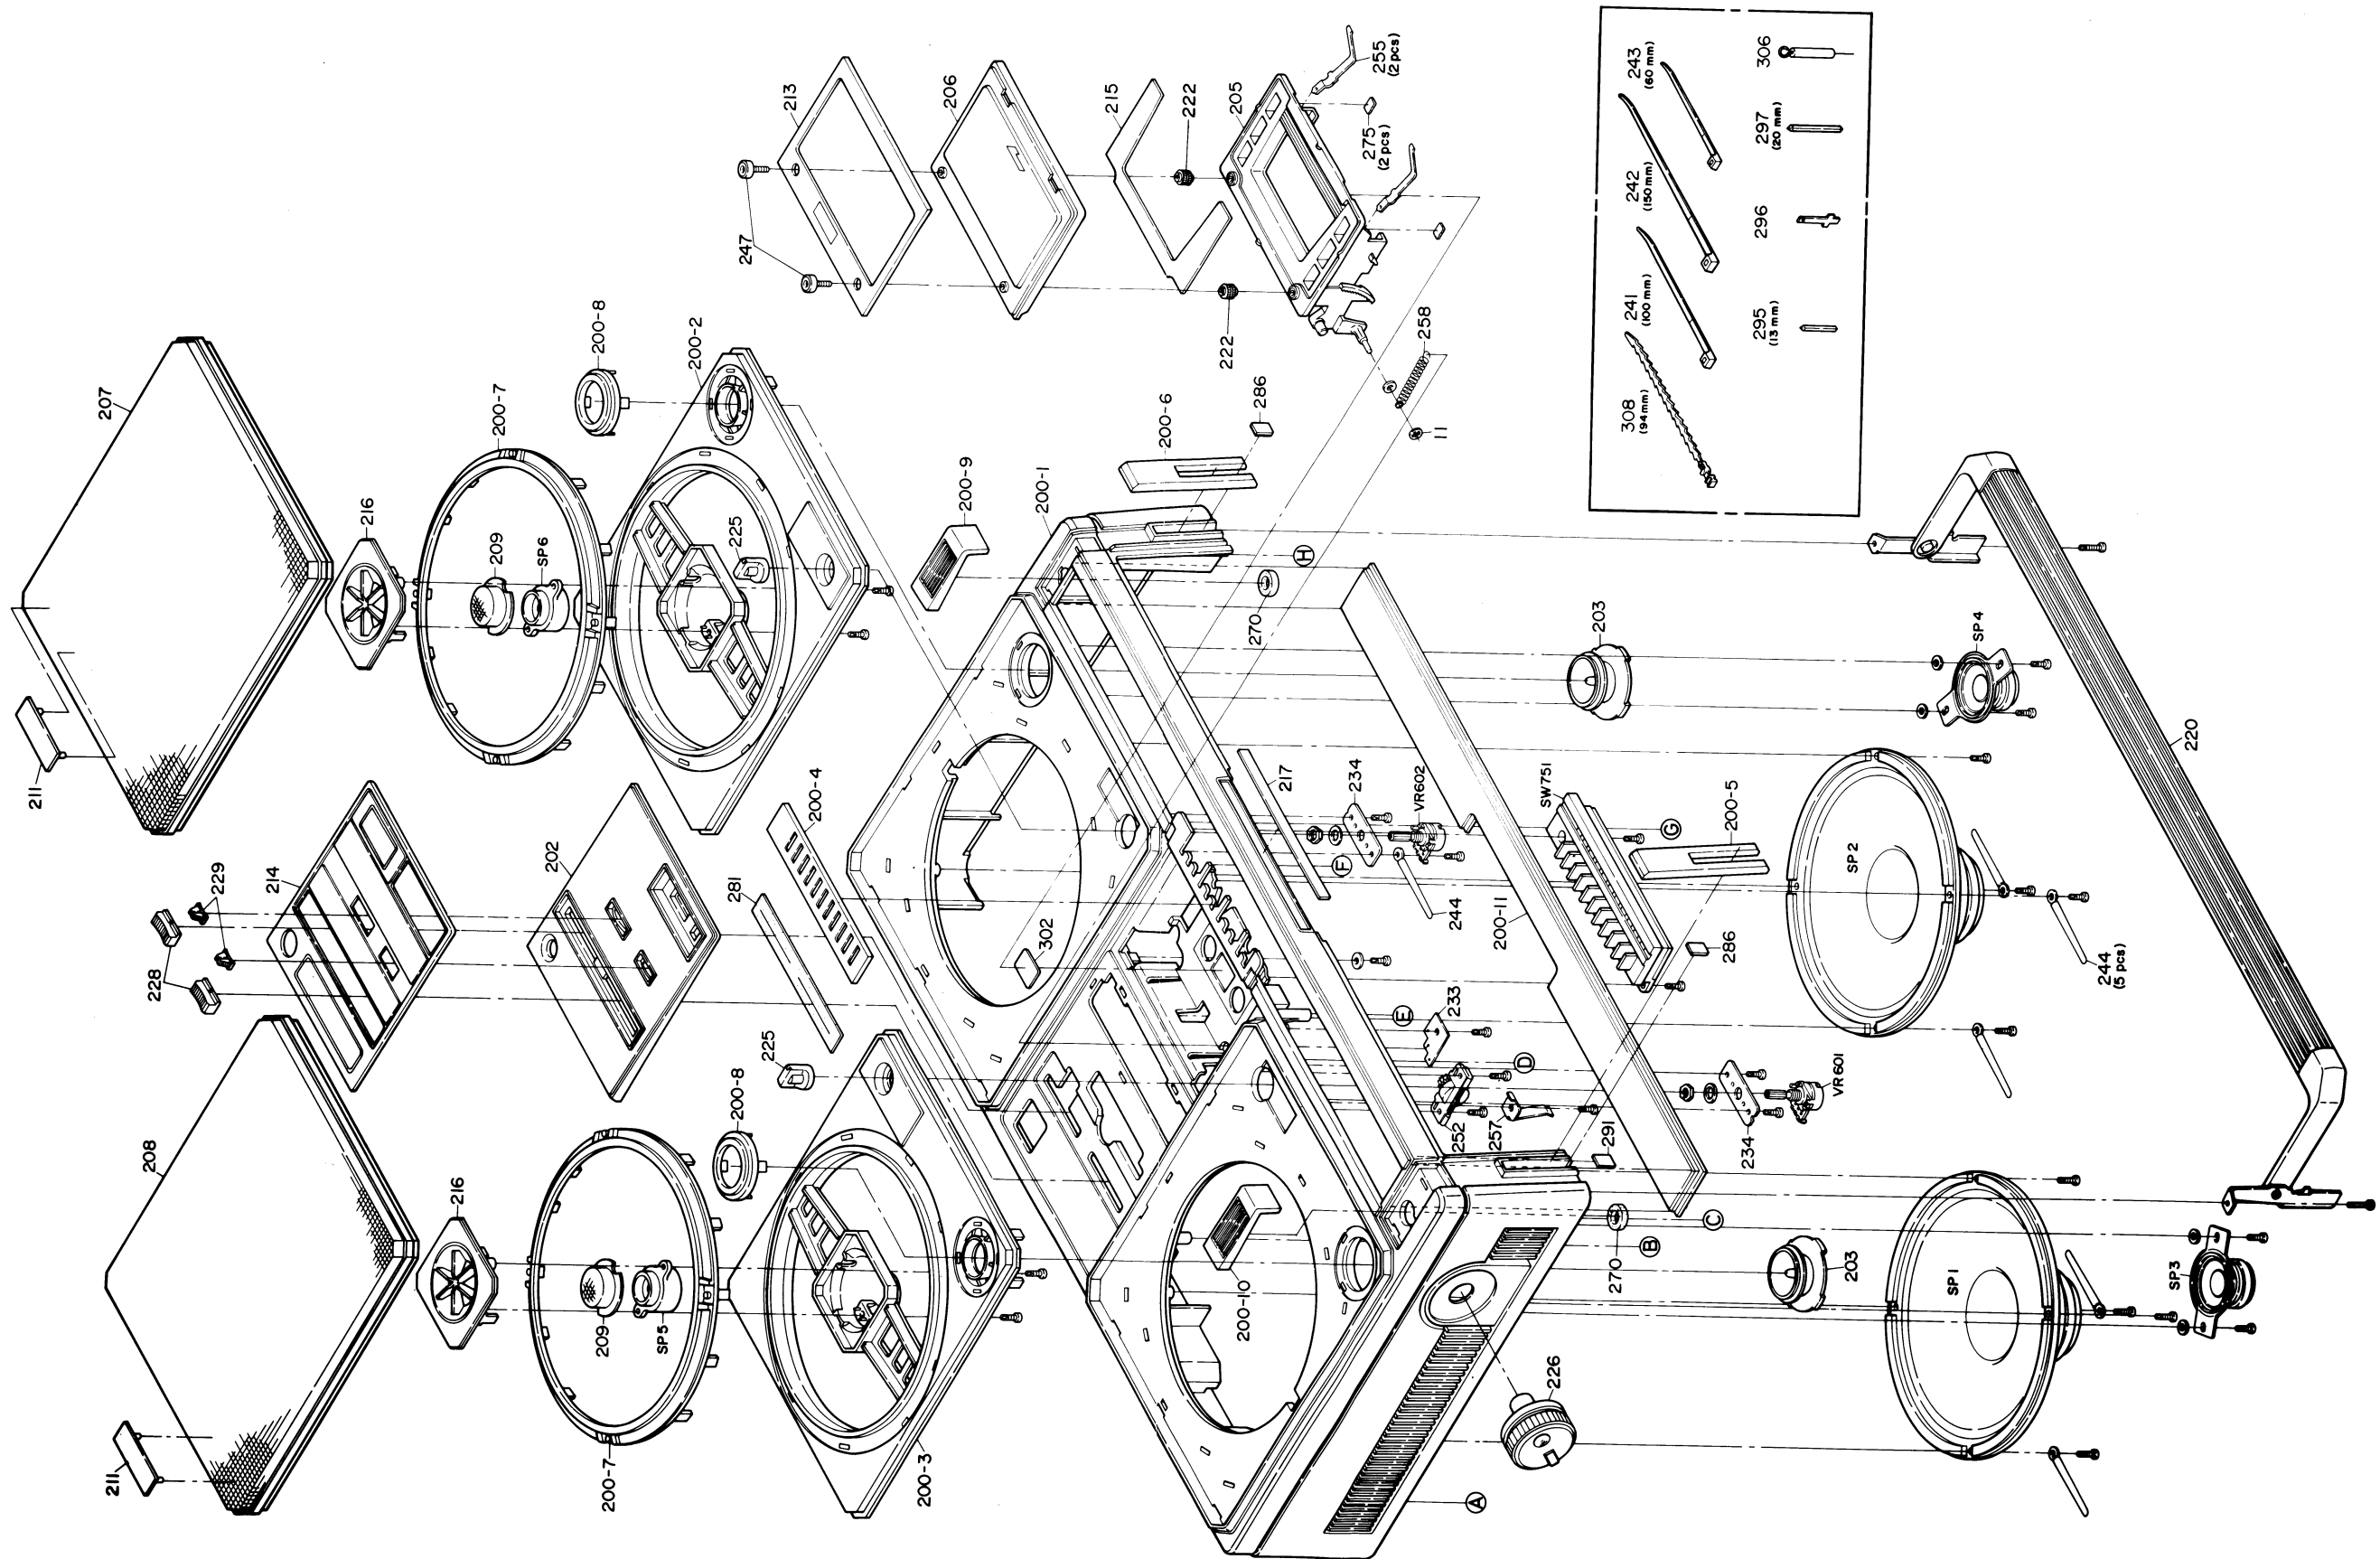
CABINET EXPLODED VIEW (FRONT CABINET)
